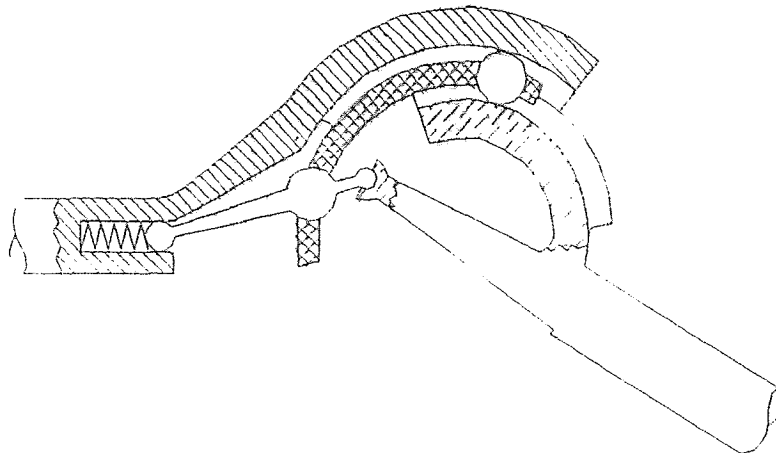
4 This sliced piece of a Rzeppa CV shaft coupling shows the ball cage, directed by the spring loaded pilot lever, positioning a ball in a position symmetric to both the input shaft and the output shaft.
